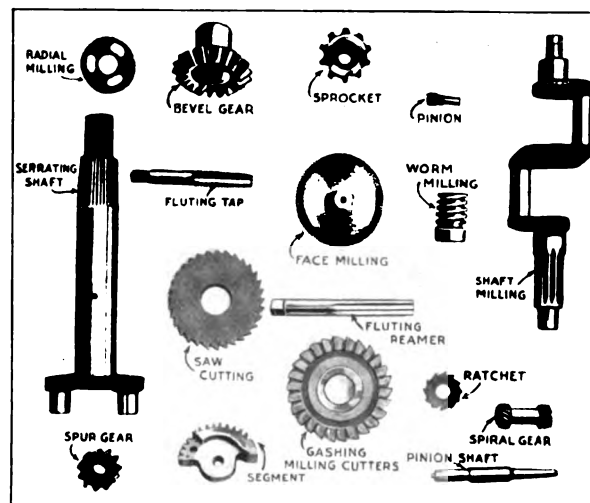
Samples of Work Done on "Bilton" Gear Milling Machines
